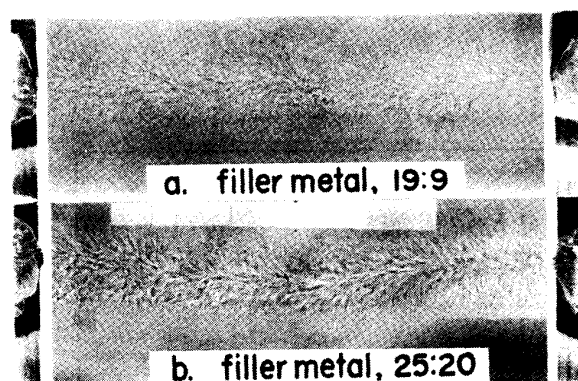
Effect of filler metals on the appearance of the mottling. The mottling is more pronounced when a 25:20 filler metal is used instead of a 19:9 filler metal.
